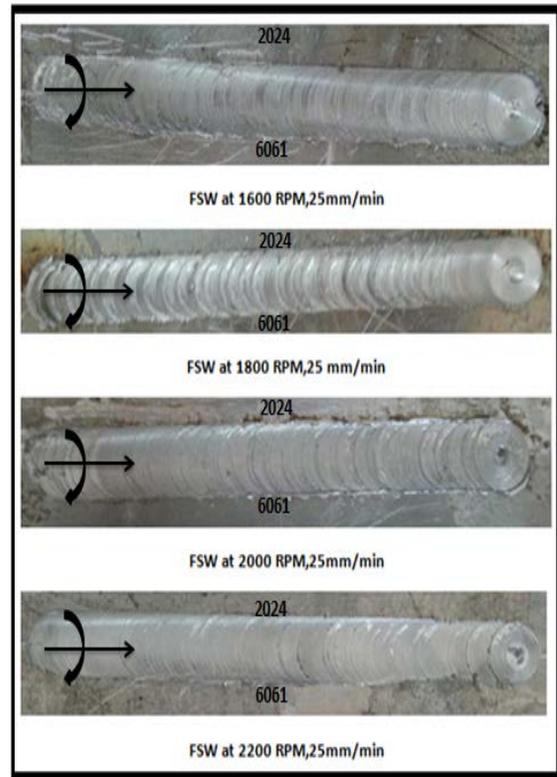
surface of welding line for all (FSW) specimens.
